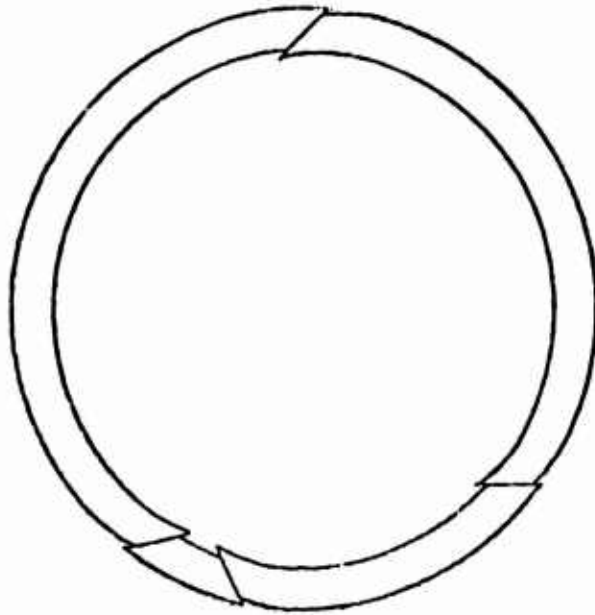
Sketch To Illustrate Type of Cracking Observed During Tube Pointing.
